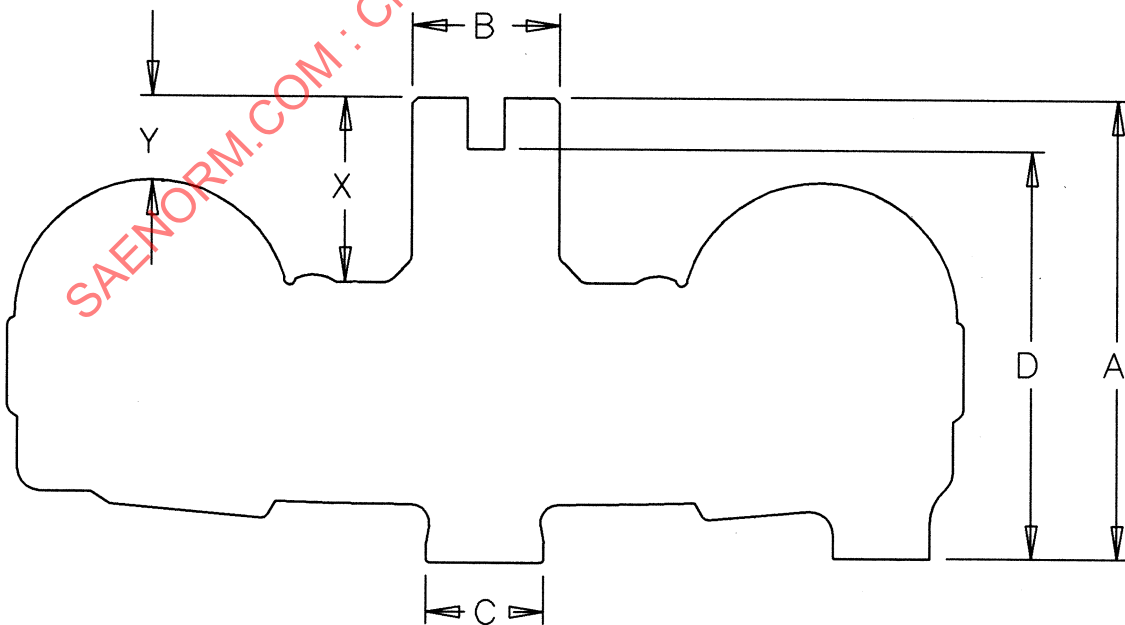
TORQUE CONVERTER DIMENSIONS
